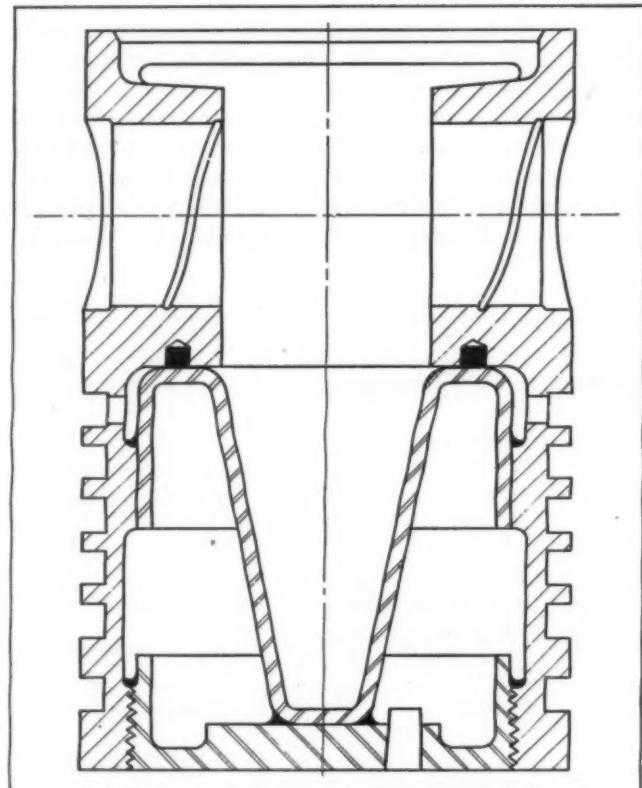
Cast iron sodium-cooled piston is silver brazed at points a, b, c, and d to an iron head and steel container
